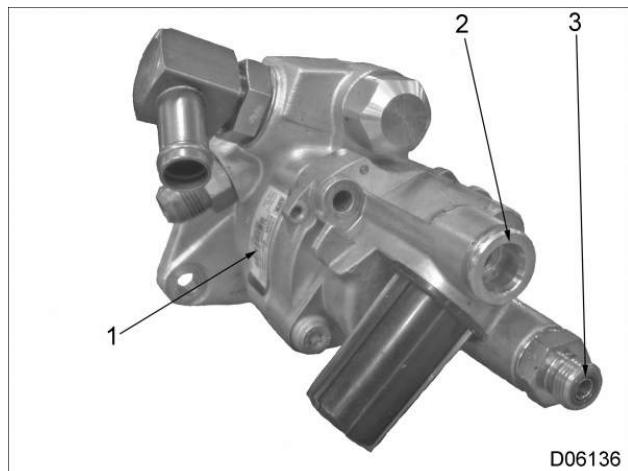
Illustration of Part Number Location and Two Types of Fuel Fittings
